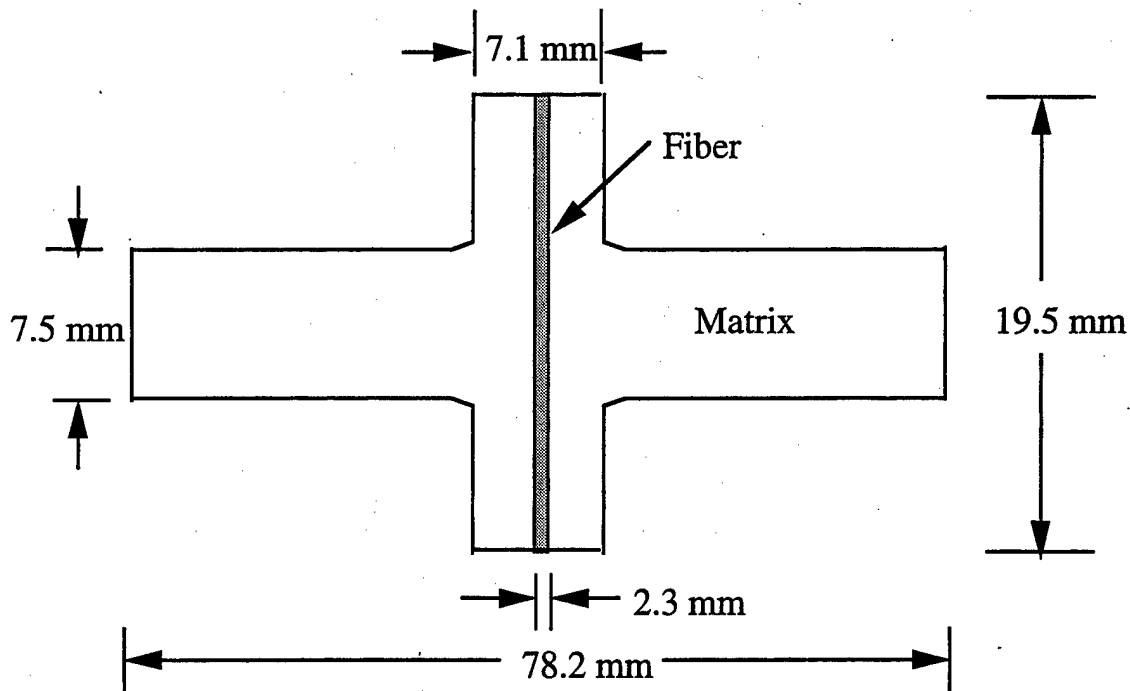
Cruciform (or Cross-Shaped) Specimen.
